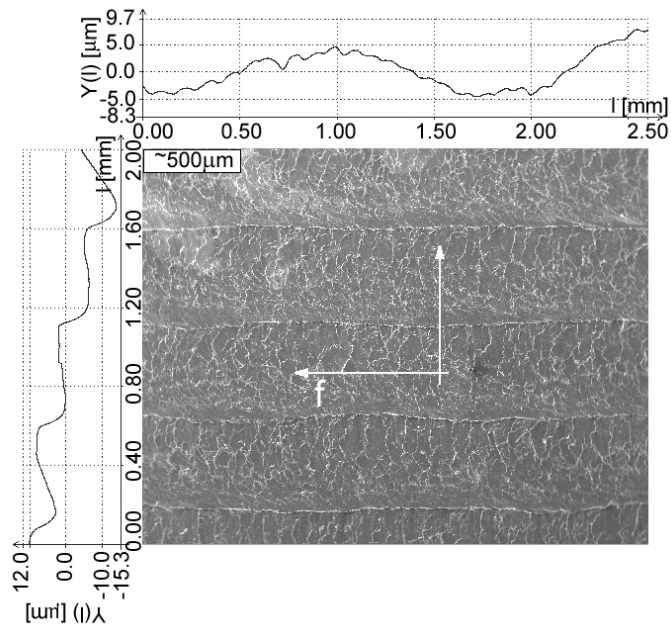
Morphology and longitudinal and lateral profilograms of a surface machined with a ball-end cutter. The cutting conditions used were:  $f_z = 0.04$  mm/tooth,  $a_p = 0.25$  mm,  $f_w = 0.5$  mm,  $D_c = 12$  mm,  $n = 2500$  rpm, 45 steel workpiece material,  $0^\circ$  angle, out-cut milling. Magnification of 50
